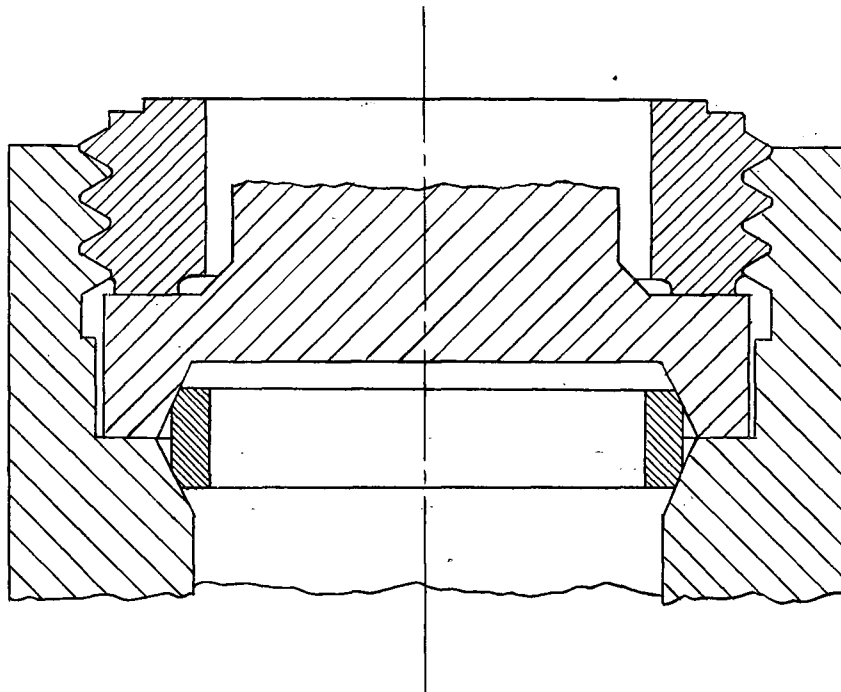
A Double-Cone Ring Gasket Assembly Utilizing Threaded Plug
